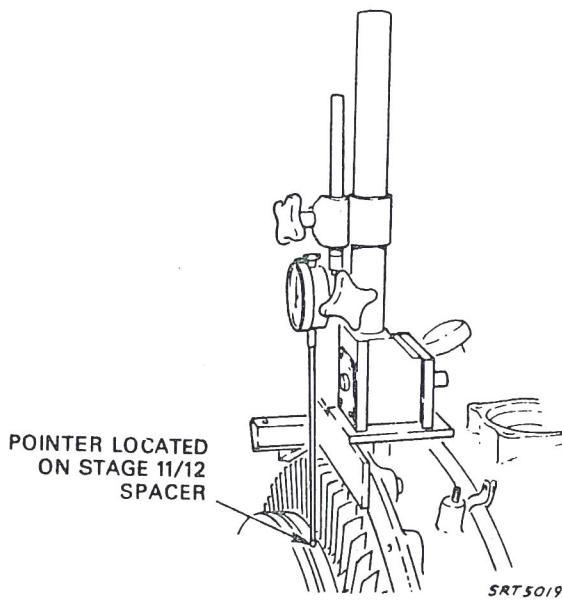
Bracket - Magnetic base and clock - Mounted on outlet casing - Pointer located on spacer
